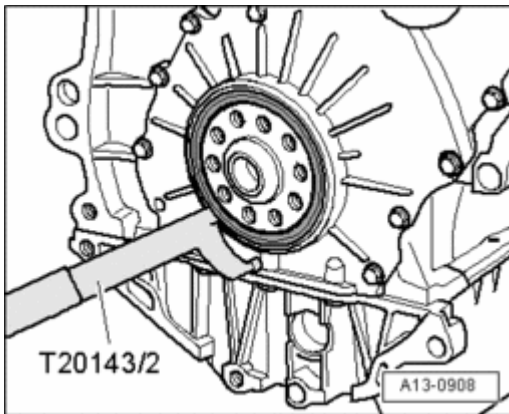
Prying Out Oil Seal Using Pressing-Out Tool T20143/2
